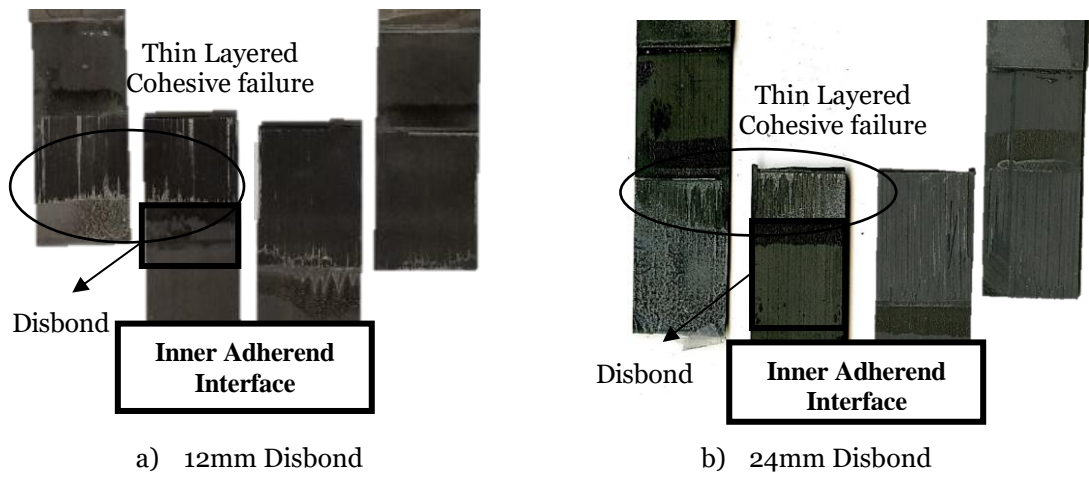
Fracture surfaces for HTD disbond cases
